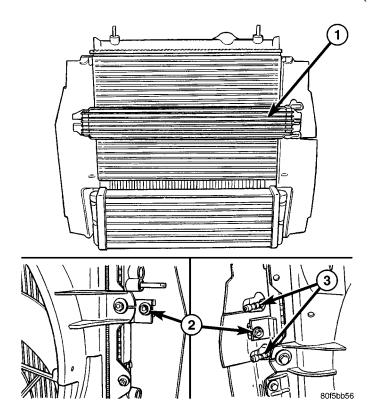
Automatic Transmission Oil Cooler -Removal/Installation 2.4L Turbo
